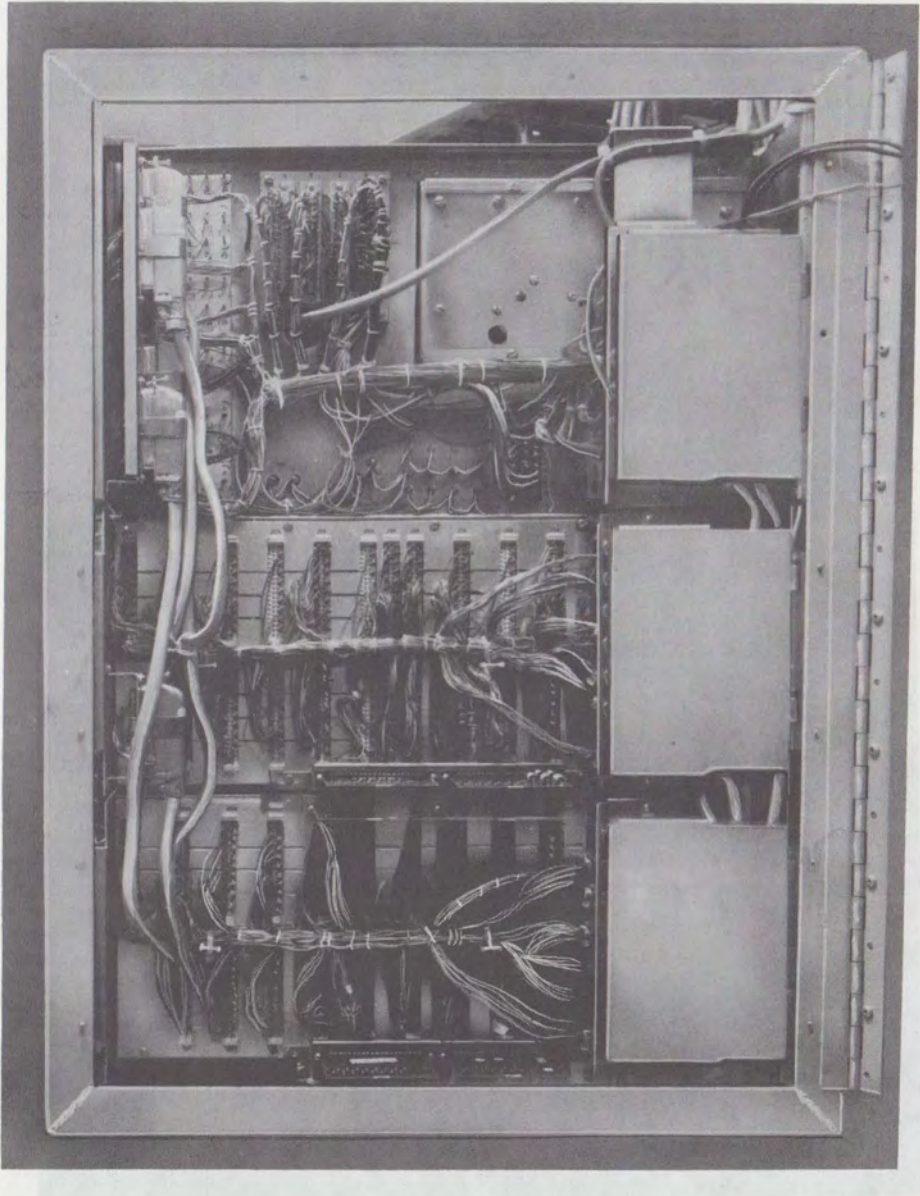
121B Apparatus Box, Rear of Gate Assembly
